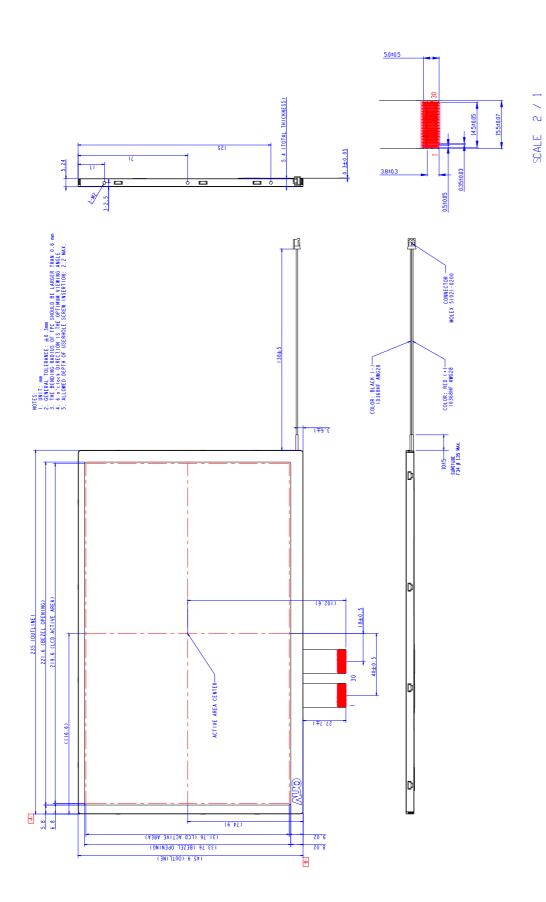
Outline dimension of TFT-LCD module (Front Side)
